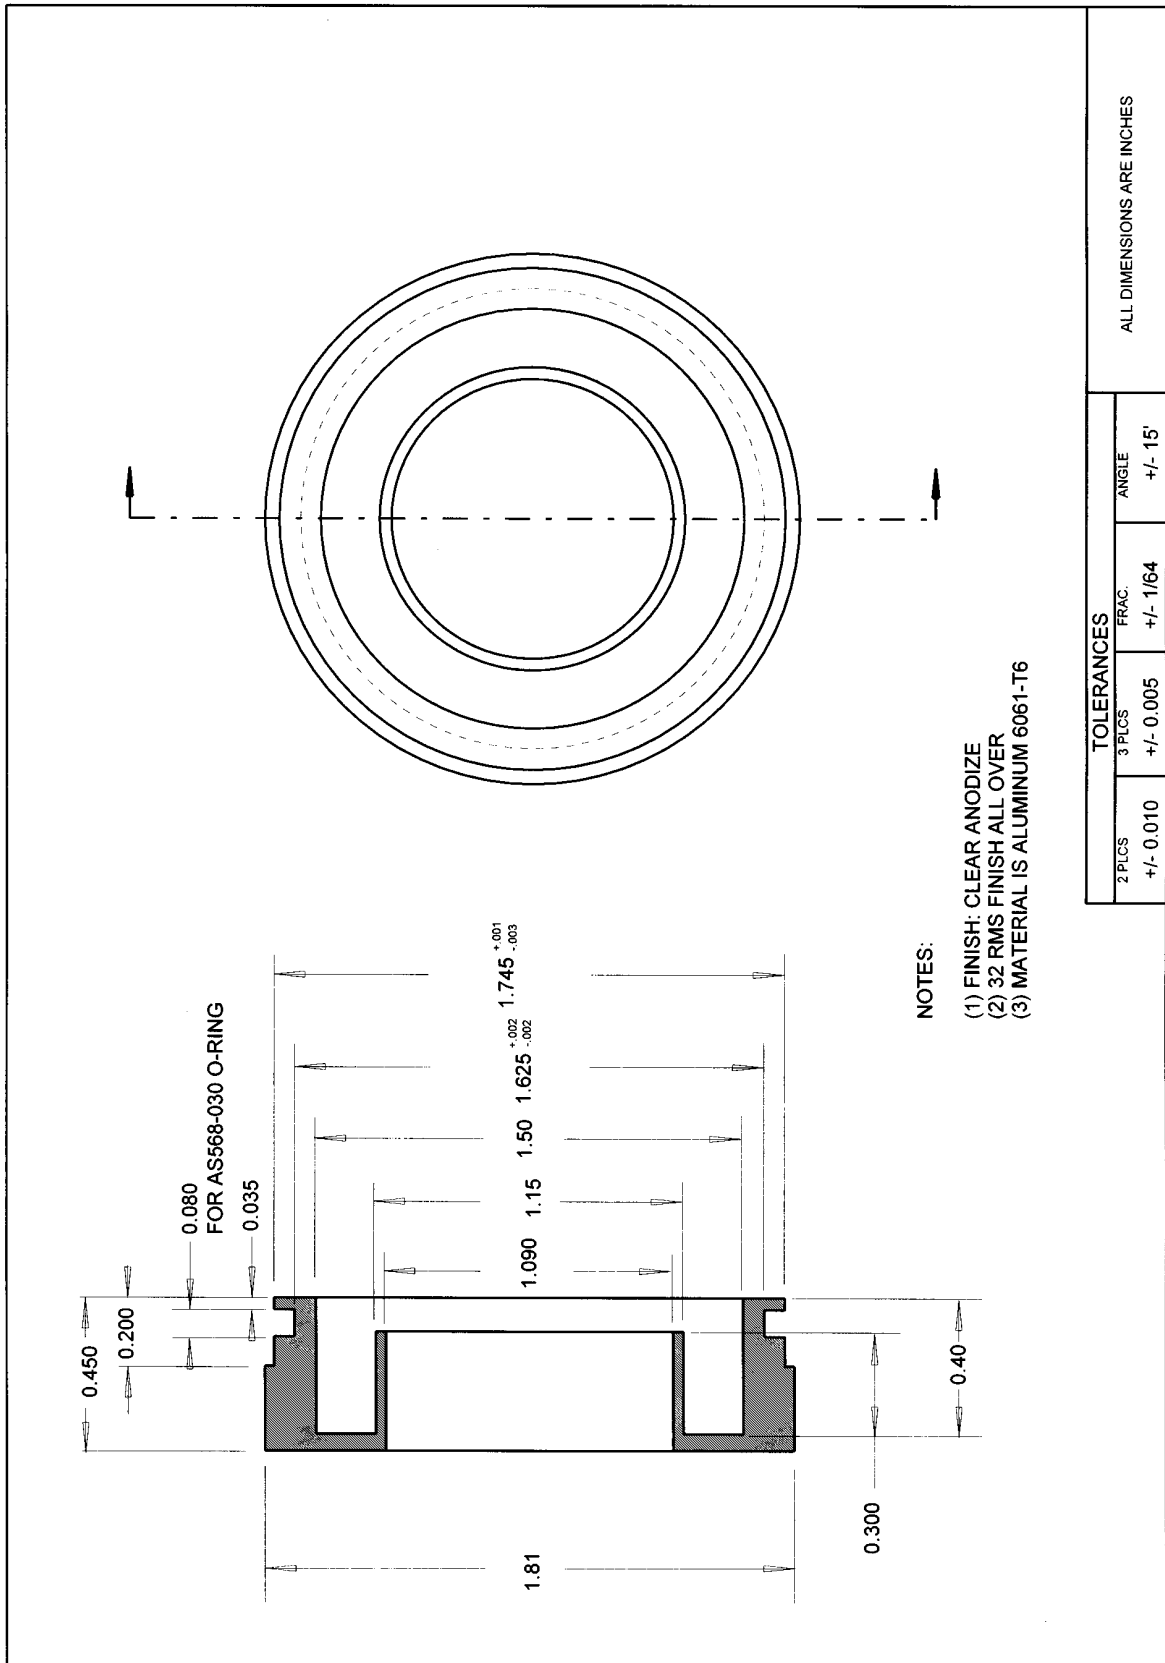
2.5-MICRON IMPACTOR WELL, LOWER SECTION
